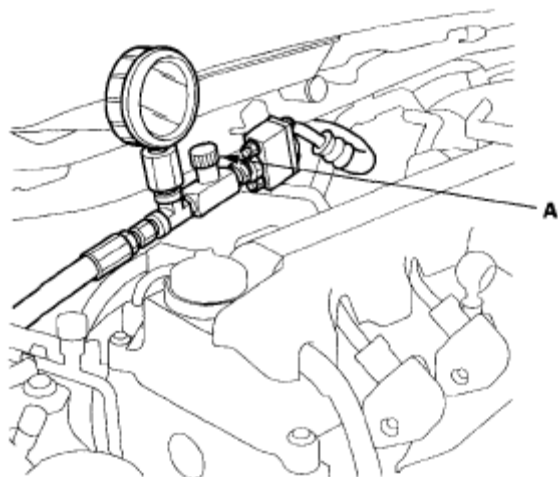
Identifying Shut-Off Valve - P/S Pressure Gauge
